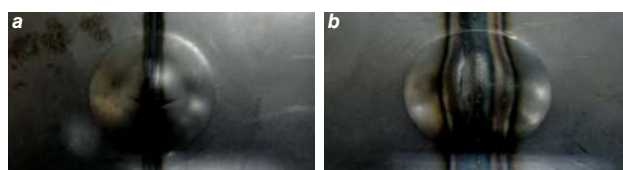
Erichsen cup test specimens (a) laser weld; and (b) laser hybrid weld
